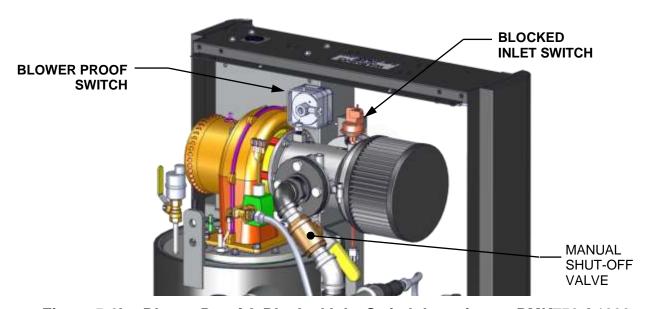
Blower Proof & Blocked Inlet Switch Locations – BMK750 &1000
